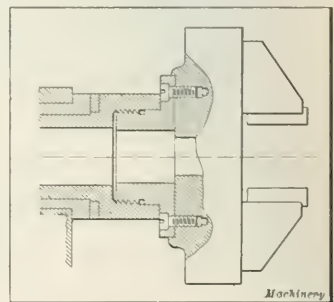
Chuck with Adapter fitted to Inside of Spindle Nose
